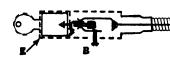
shows switch used on Model "A" Ford. The theory of operation is same as explained above; difference being in the shape of parts only. Unlike the standard "Electrolock" assembly, however, the distributor housing may be removed from cable and switch, by removing cylinder head nut which holds cable; releasing distributor base locking set screw, and lifting assembly clear of cylinder head, after which the distributor may be unscrewed from cable.
